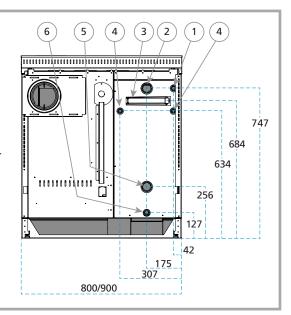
Hydraulic connection scheme of a thermal cooker RTE 60 and RTVE 60 with flue outlet on the right side (rear sight). The thermal cooker with flue outlet on the left side is symmetrical.
